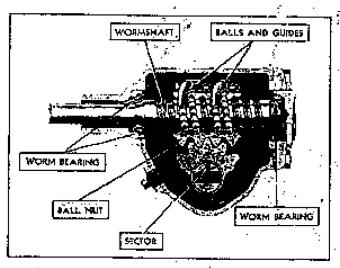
Truck Steering Gear Warm, Net and Ball Circuits
